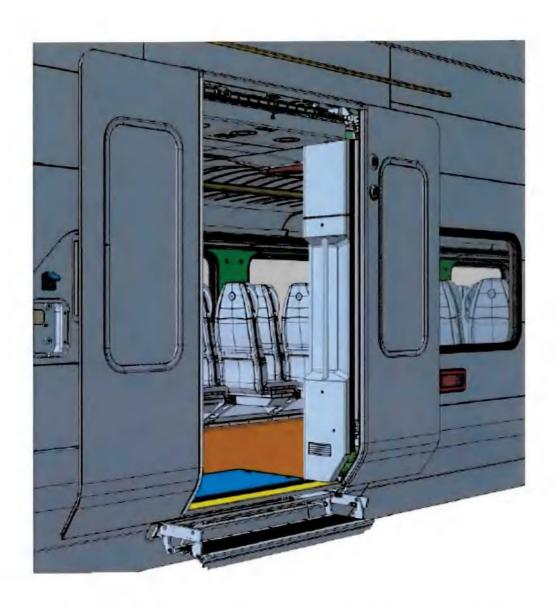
CAD Rendering of Side Door Step and Side Door Handholds
